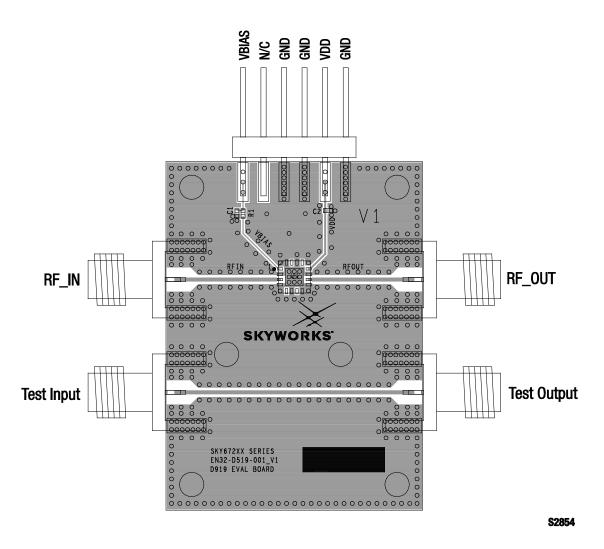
SKY67216-11 Evaluation Board Assembly Drawing
